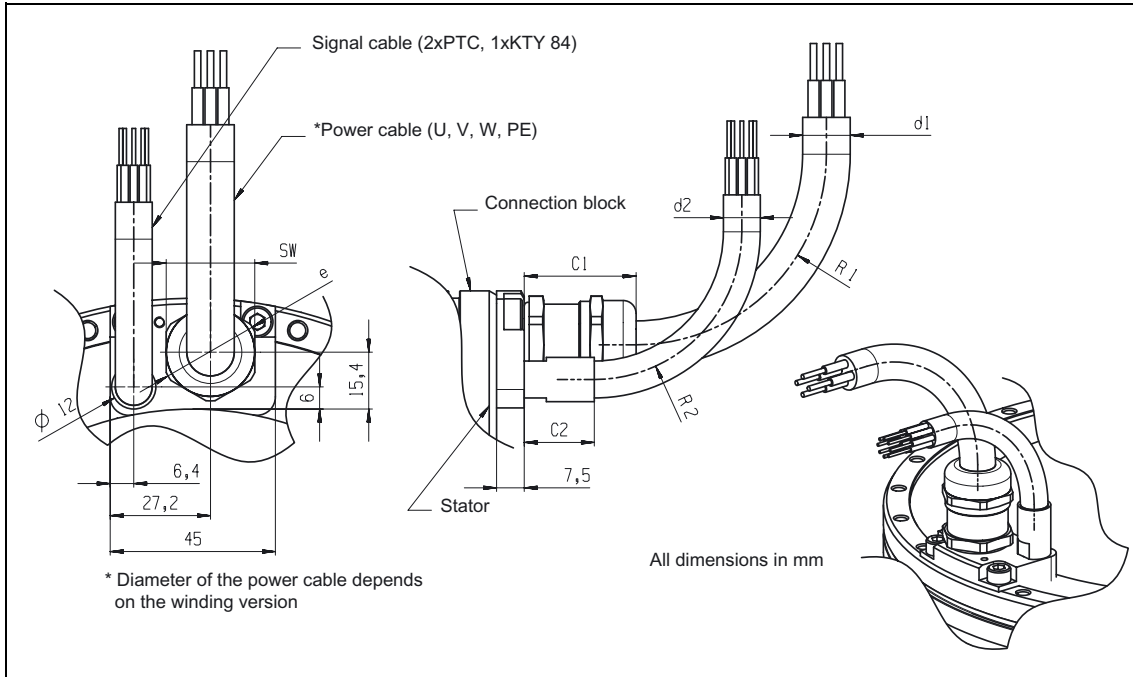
Axial electrical connection with gland for 1FW6090 (motor type A)
